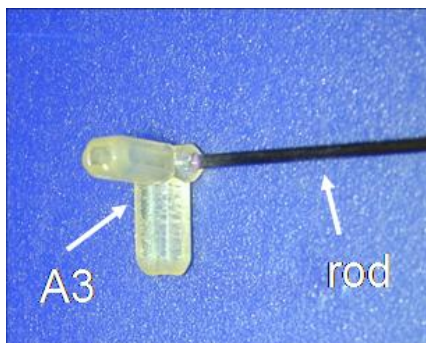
Side component type A made of joint element type A and carbon fiber rod.
